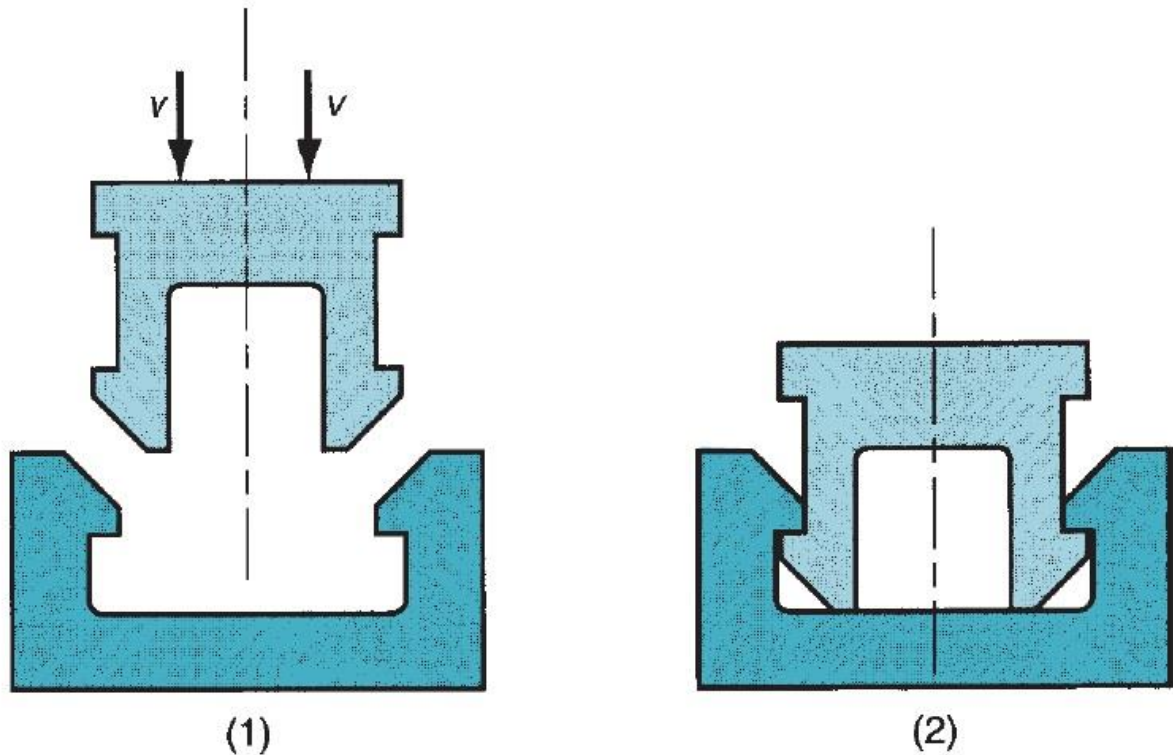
Snap fit assembly, showing cross sections of two mating parts: (1) before assembly and (2) parts snapped together.
